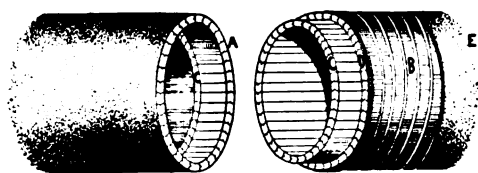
MACHINE BANDED WOOD STAVE PIPE
